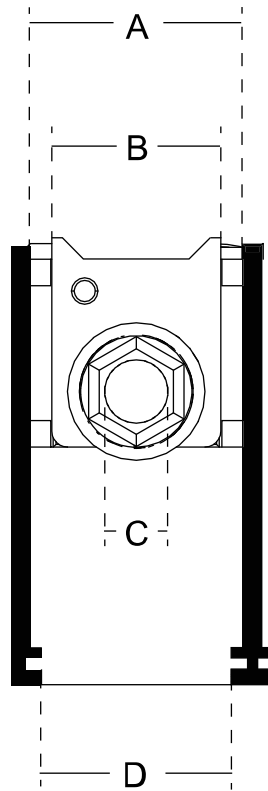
Frames 9, 10 and 11 Terminal Block Dimensions
